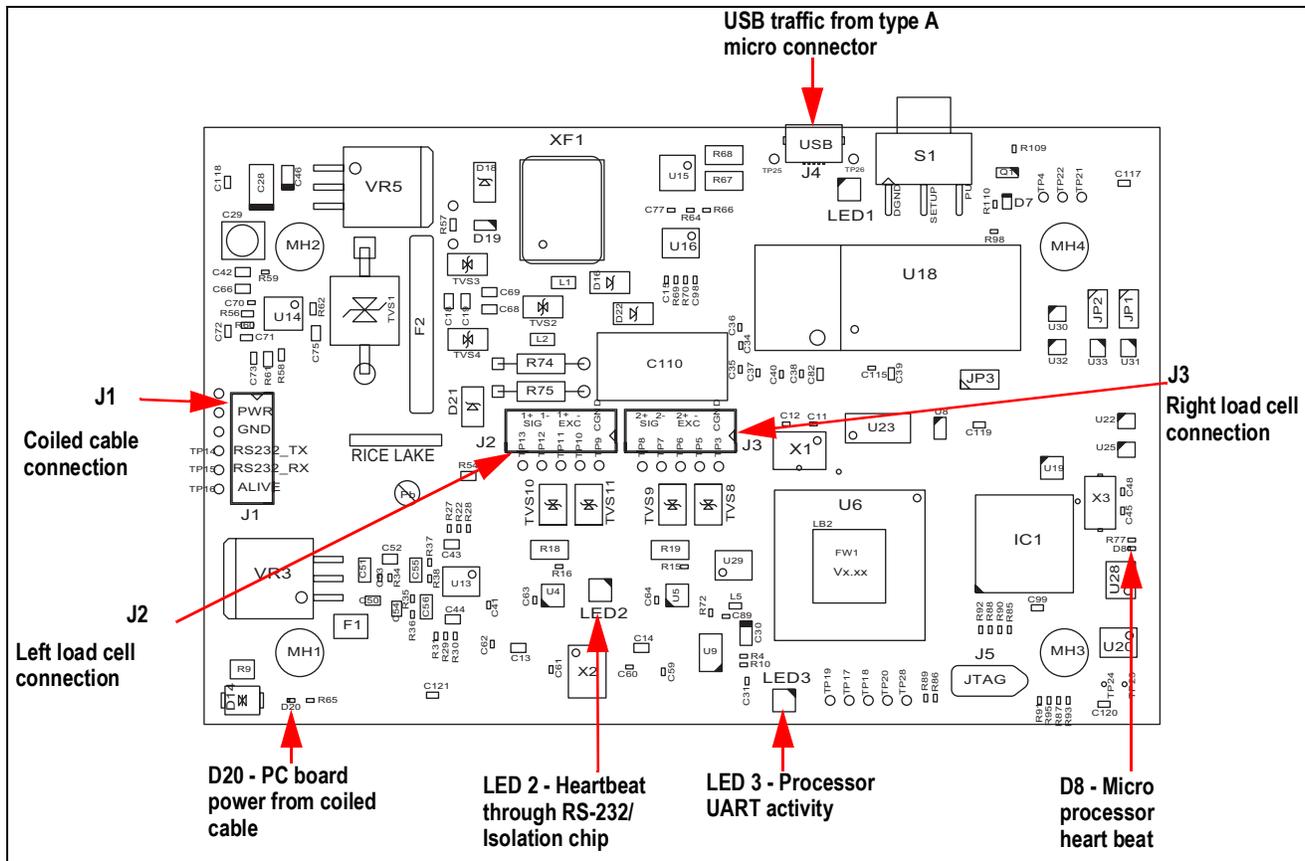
Troubleshooting iQube² PCB Assembly LEDs (PN 162508)
